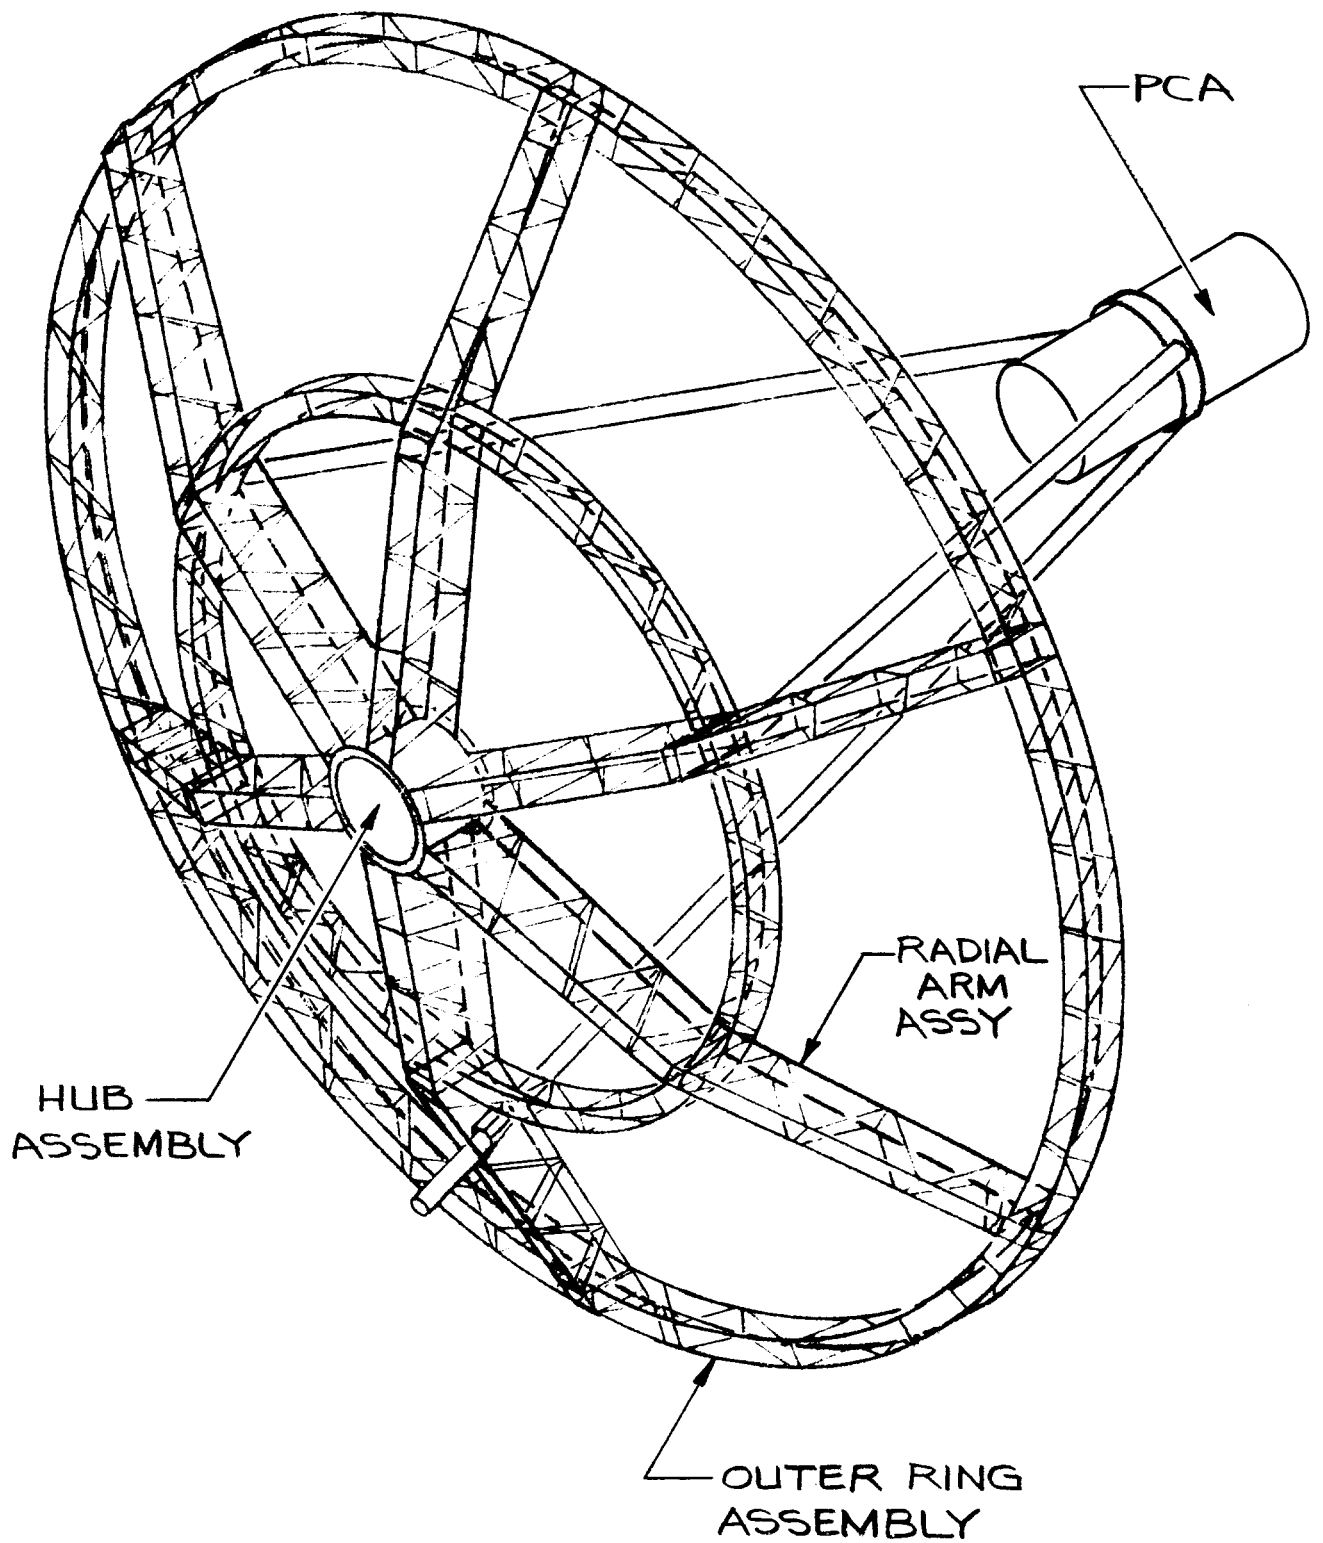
REAR SUPPORT STRUCTURE (OPTICAL PANELS REMOVED FOR CLARITY)
